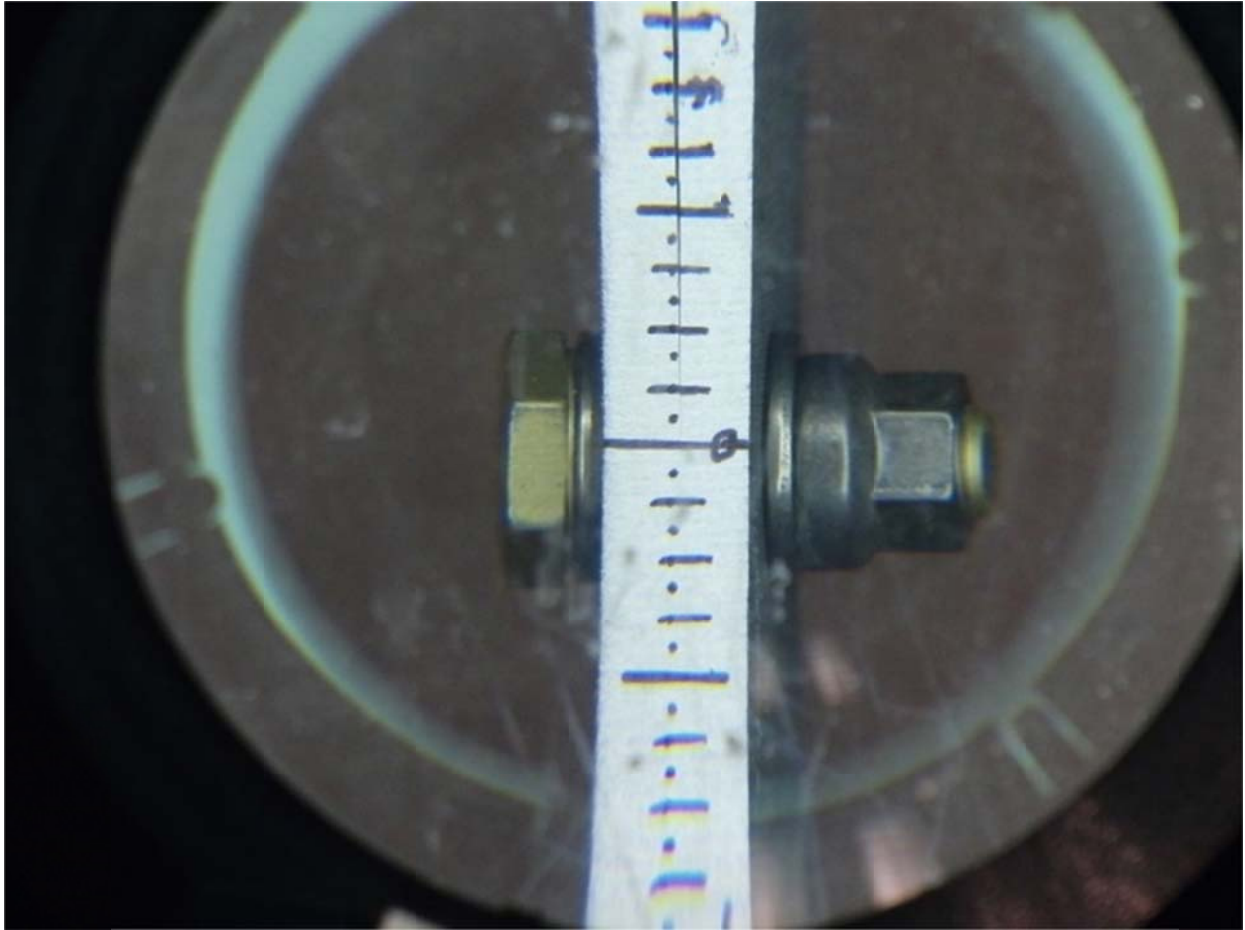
Visual Tracking of Crack-Tip Location – Crack Arrested at the Fastener
